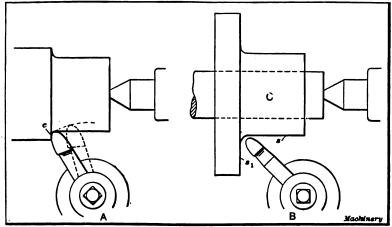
(A) The Way in which Tool is sometimes displaced by Thrust of Cut, when set at an Angle. (B) Tool Set for Finishing Cylindrical and Radial Surfaces
